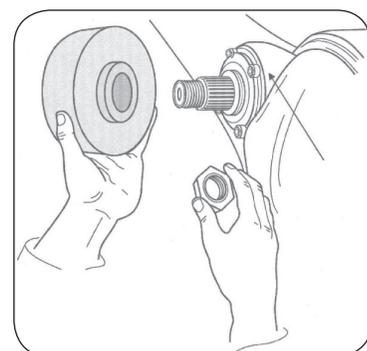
Remove bearing cage bolts to ensure seal is installed completely.
